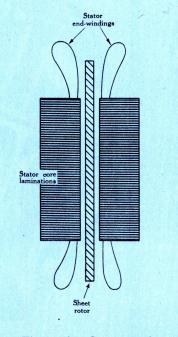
Cross section (end view) of a "sheet rotor" linear induction motor.
